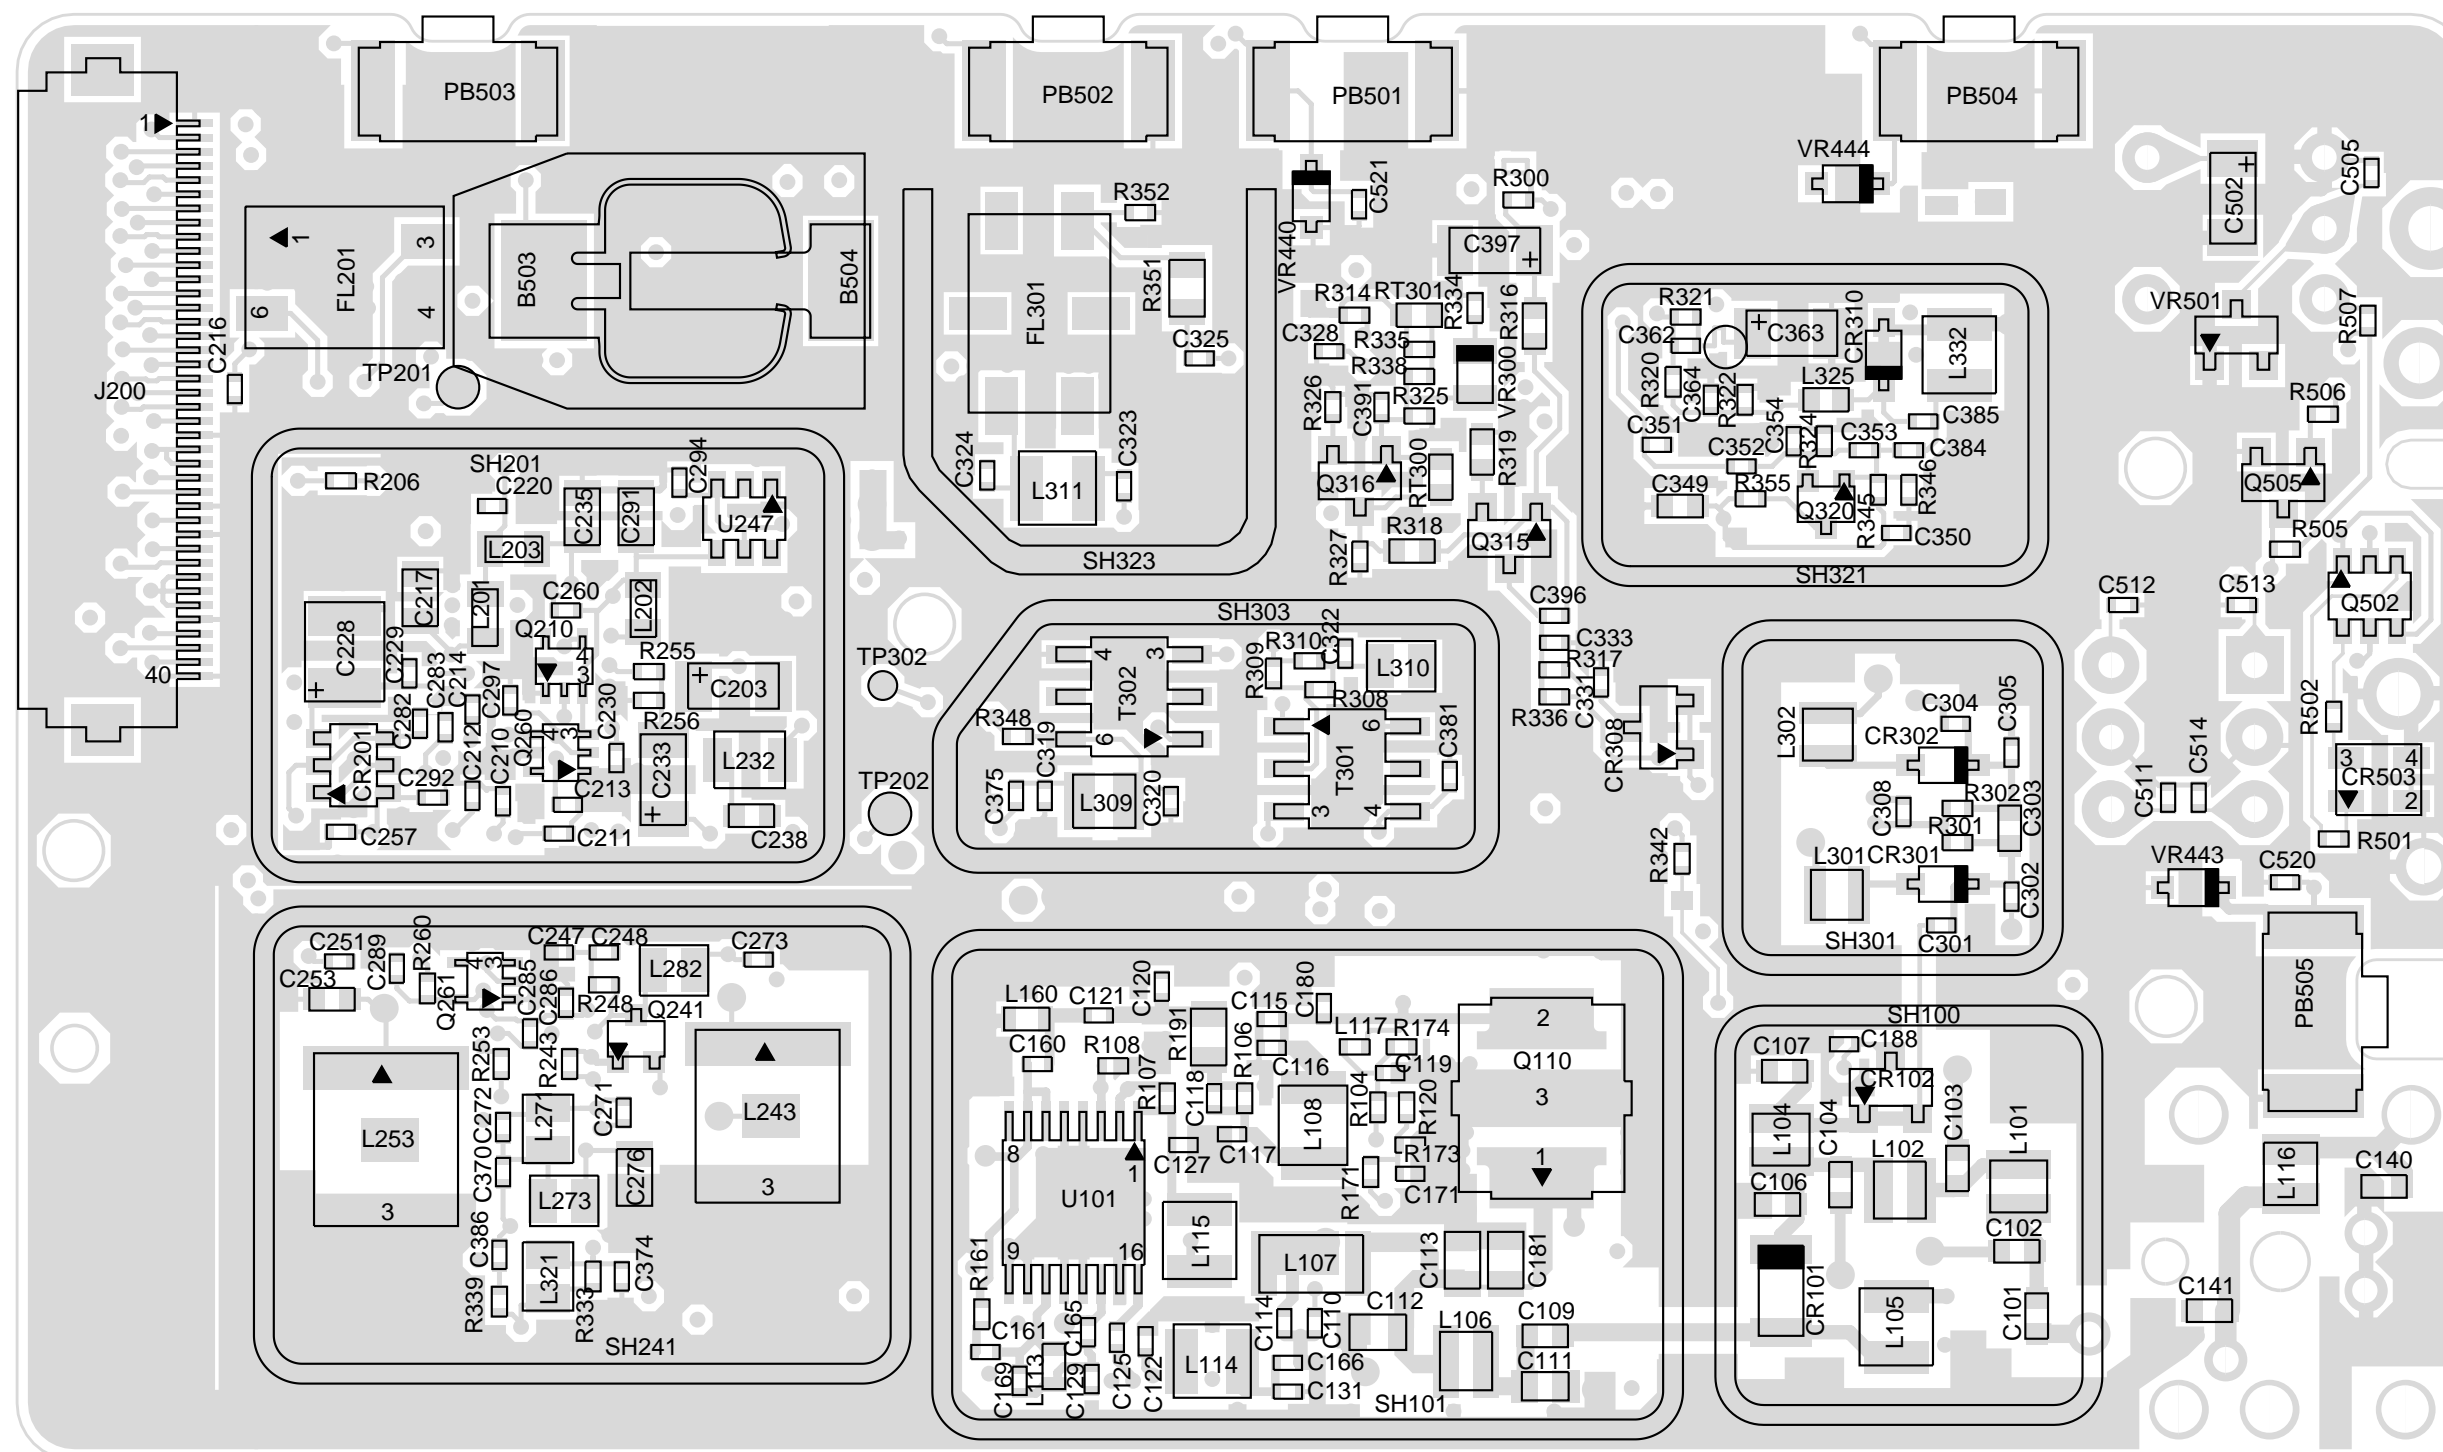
UHF Band 2 (450-527MHz) Main Board Top Side PCB No. 8485641Z02
